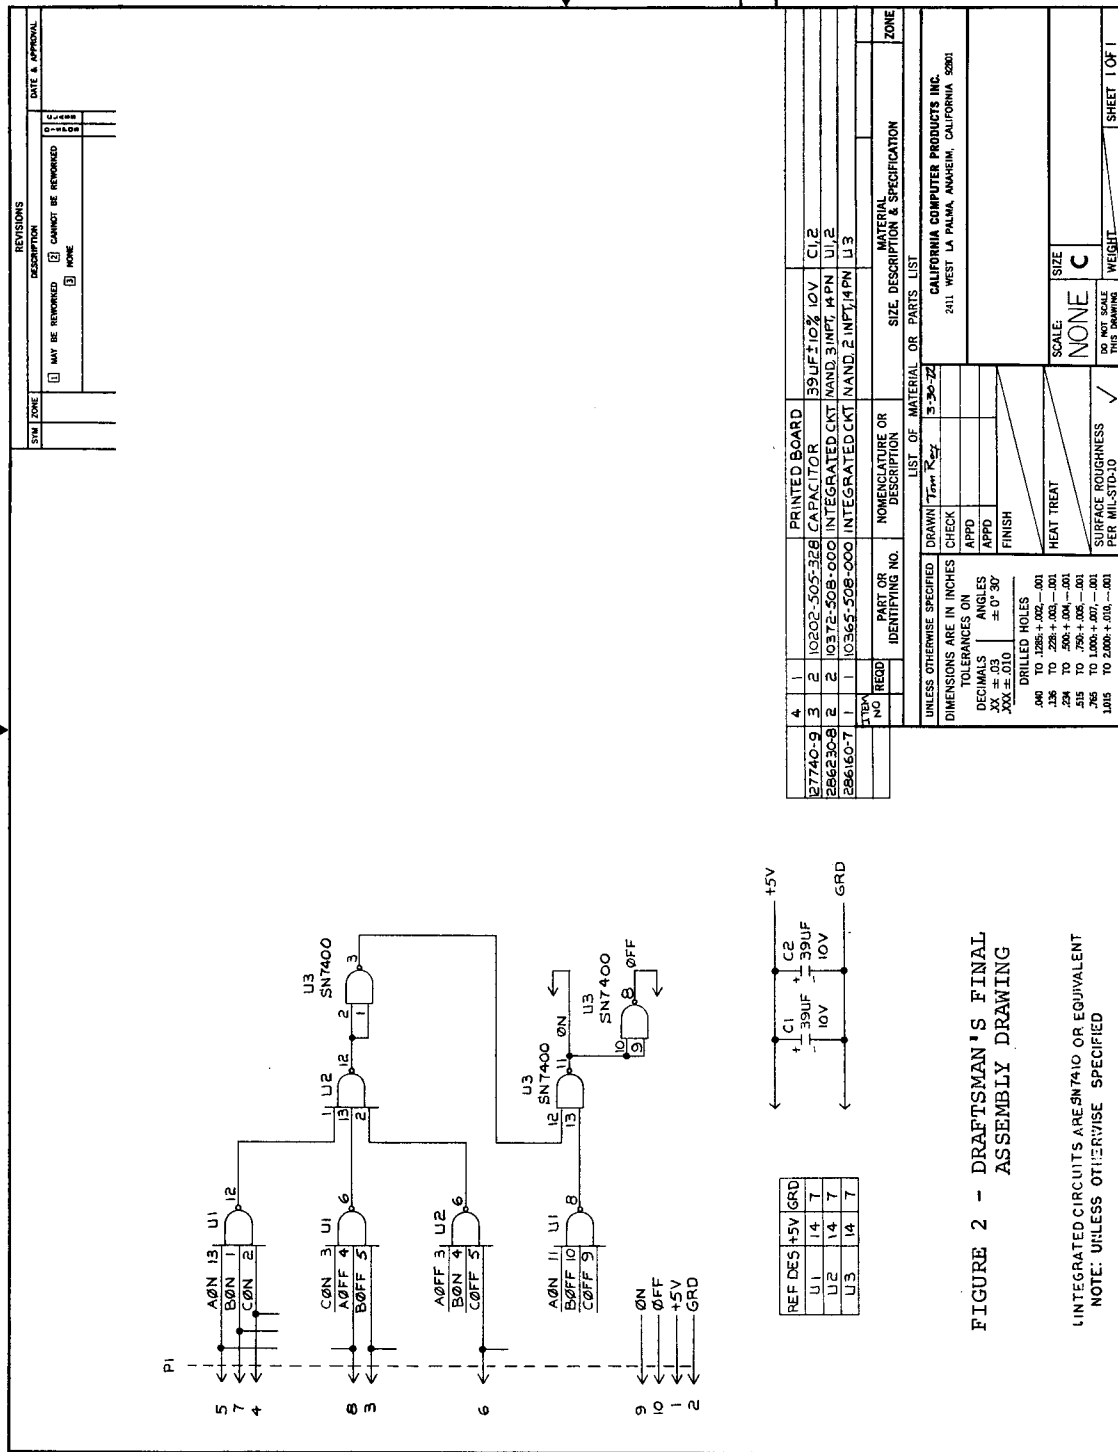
DRAFTSMAN'S FINAL ASSEMBLY DRAWING
